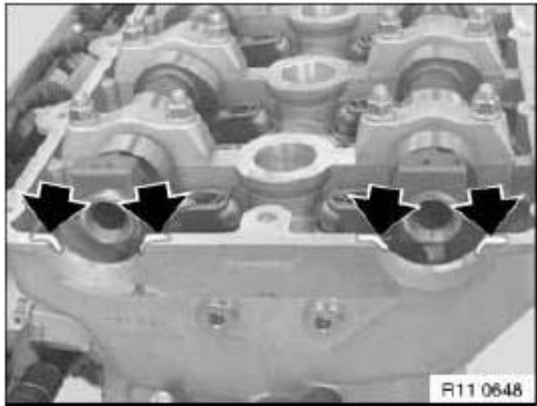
Locating Gasket Sealing Surfaces (2 Of 2)
